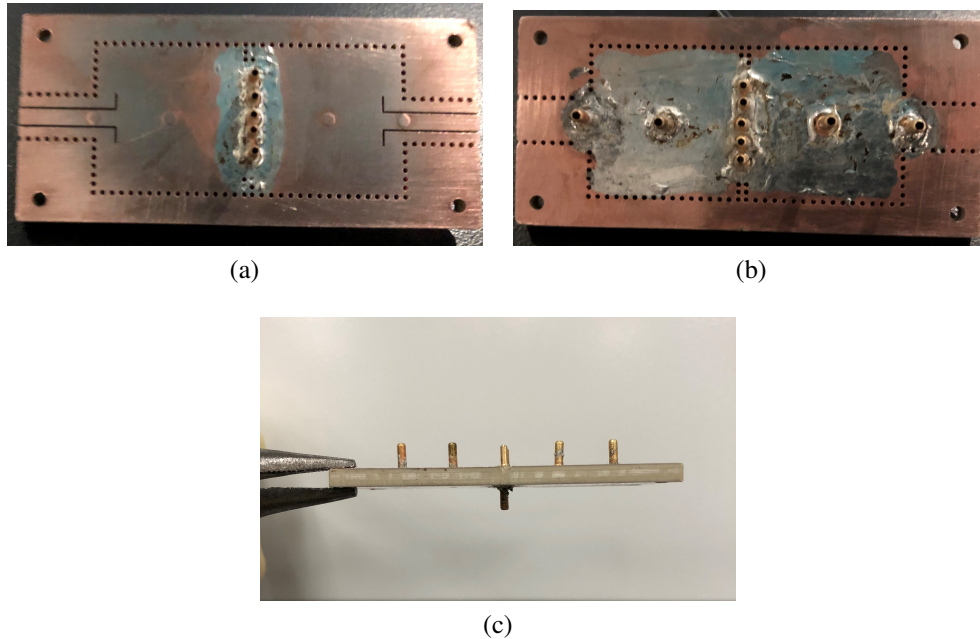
Fabricated fully reconfigurable filter design with PCB rivets soldered onto each of the tuning holes from different angles. Photographs of the a) top view, b) bottom view, and c) side view of the design are shown.
